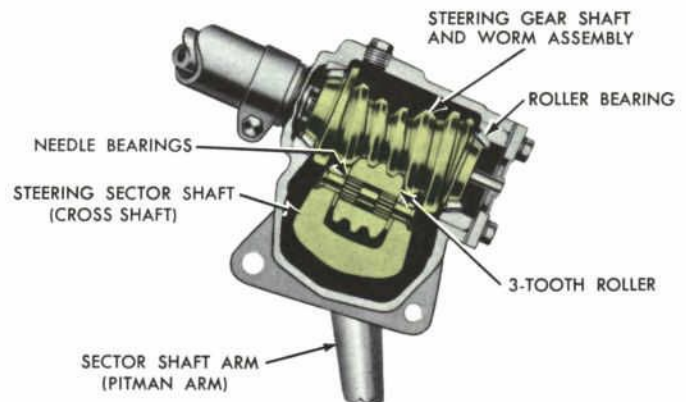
Gemmer Worm-and-Roller Steering Gear
